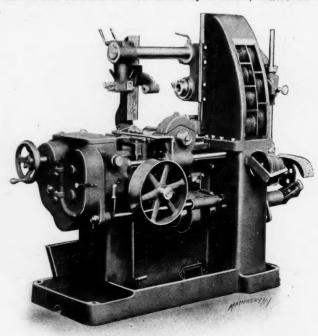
Rear View of No. 3 Machine, showing Driving Connections
